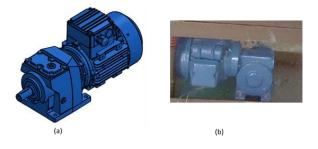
a. Sketch of motor in SOLIDWORKS program b. Photograph of the motor and gear box.
